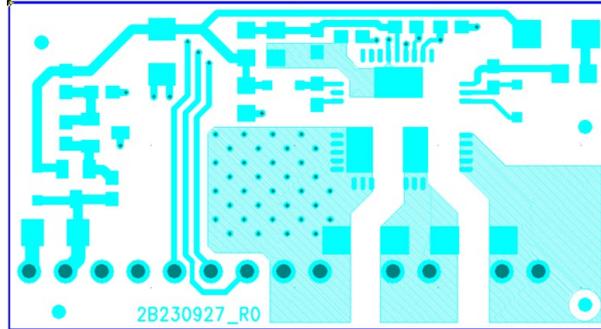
MASTERGAN1L daughterboard layout – bottom side
